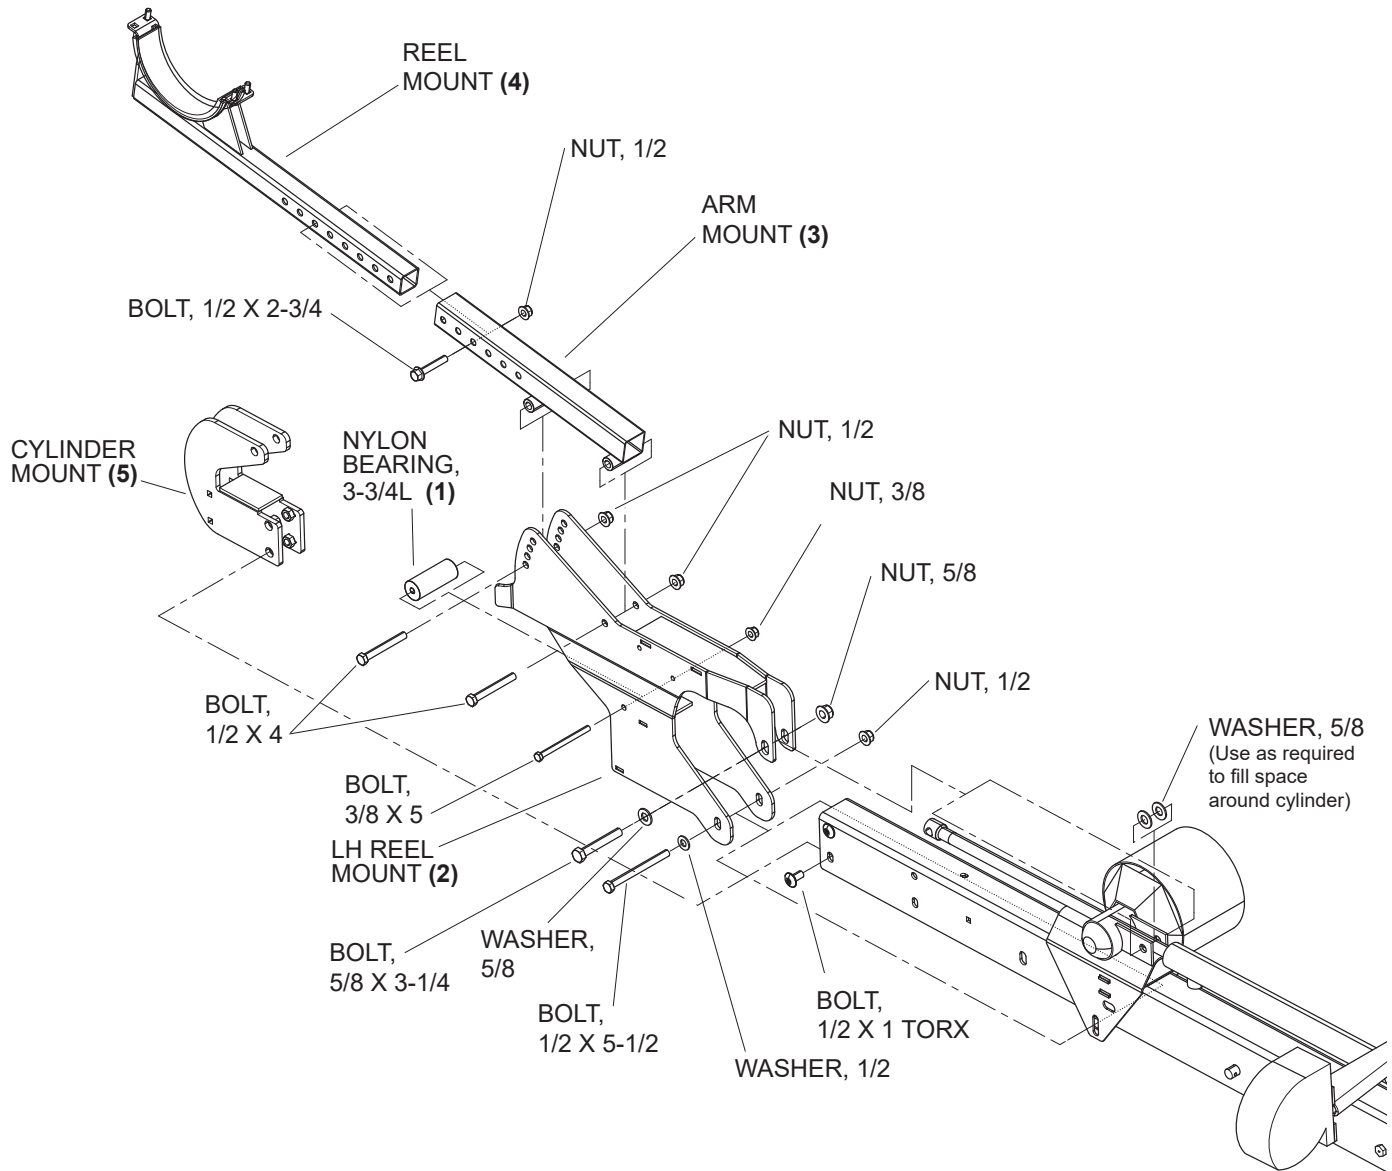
Left reel arm mount assembly (FD1 & FD75 headers)
